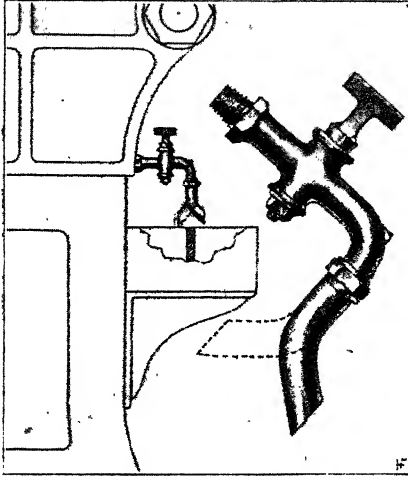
SWITCH-COCK AND DOUBLE GUTTER.
